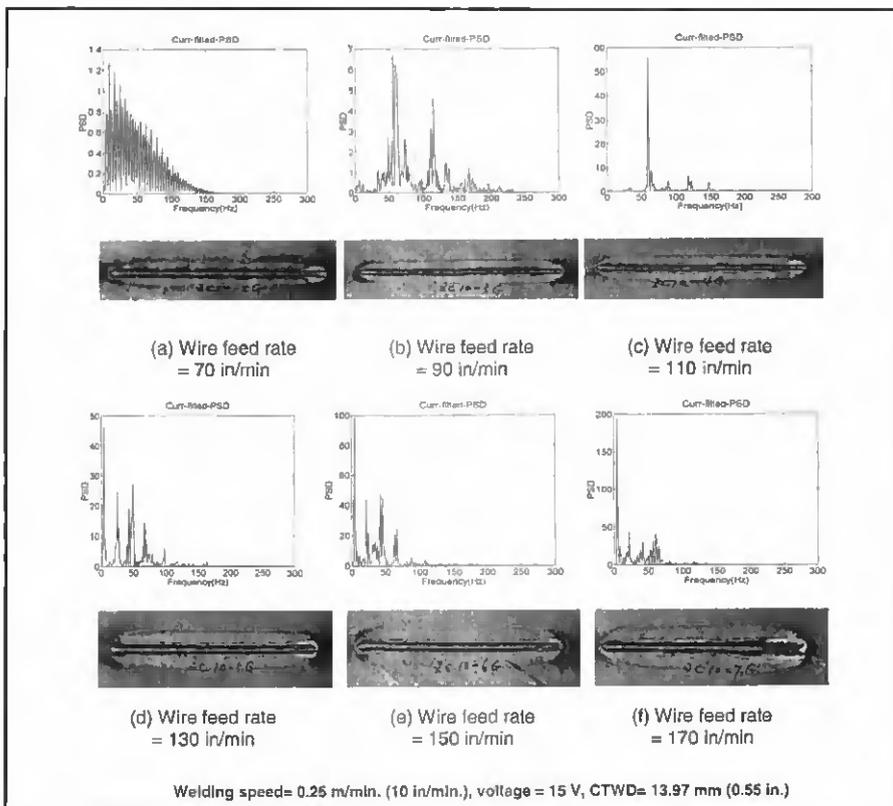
Power spectral density analyses for different wire feed rates (galvanized steel): A — 70 in./min; B — 90 in./min; C — 110 in./min; D — 130 in./min; E — 150 in./min; and F — 170 in./min. Welding speed = 0.25 m/min (10 in./min), voltage = 15 V, and CTWD = 13.97 mm (0.55 in.).
